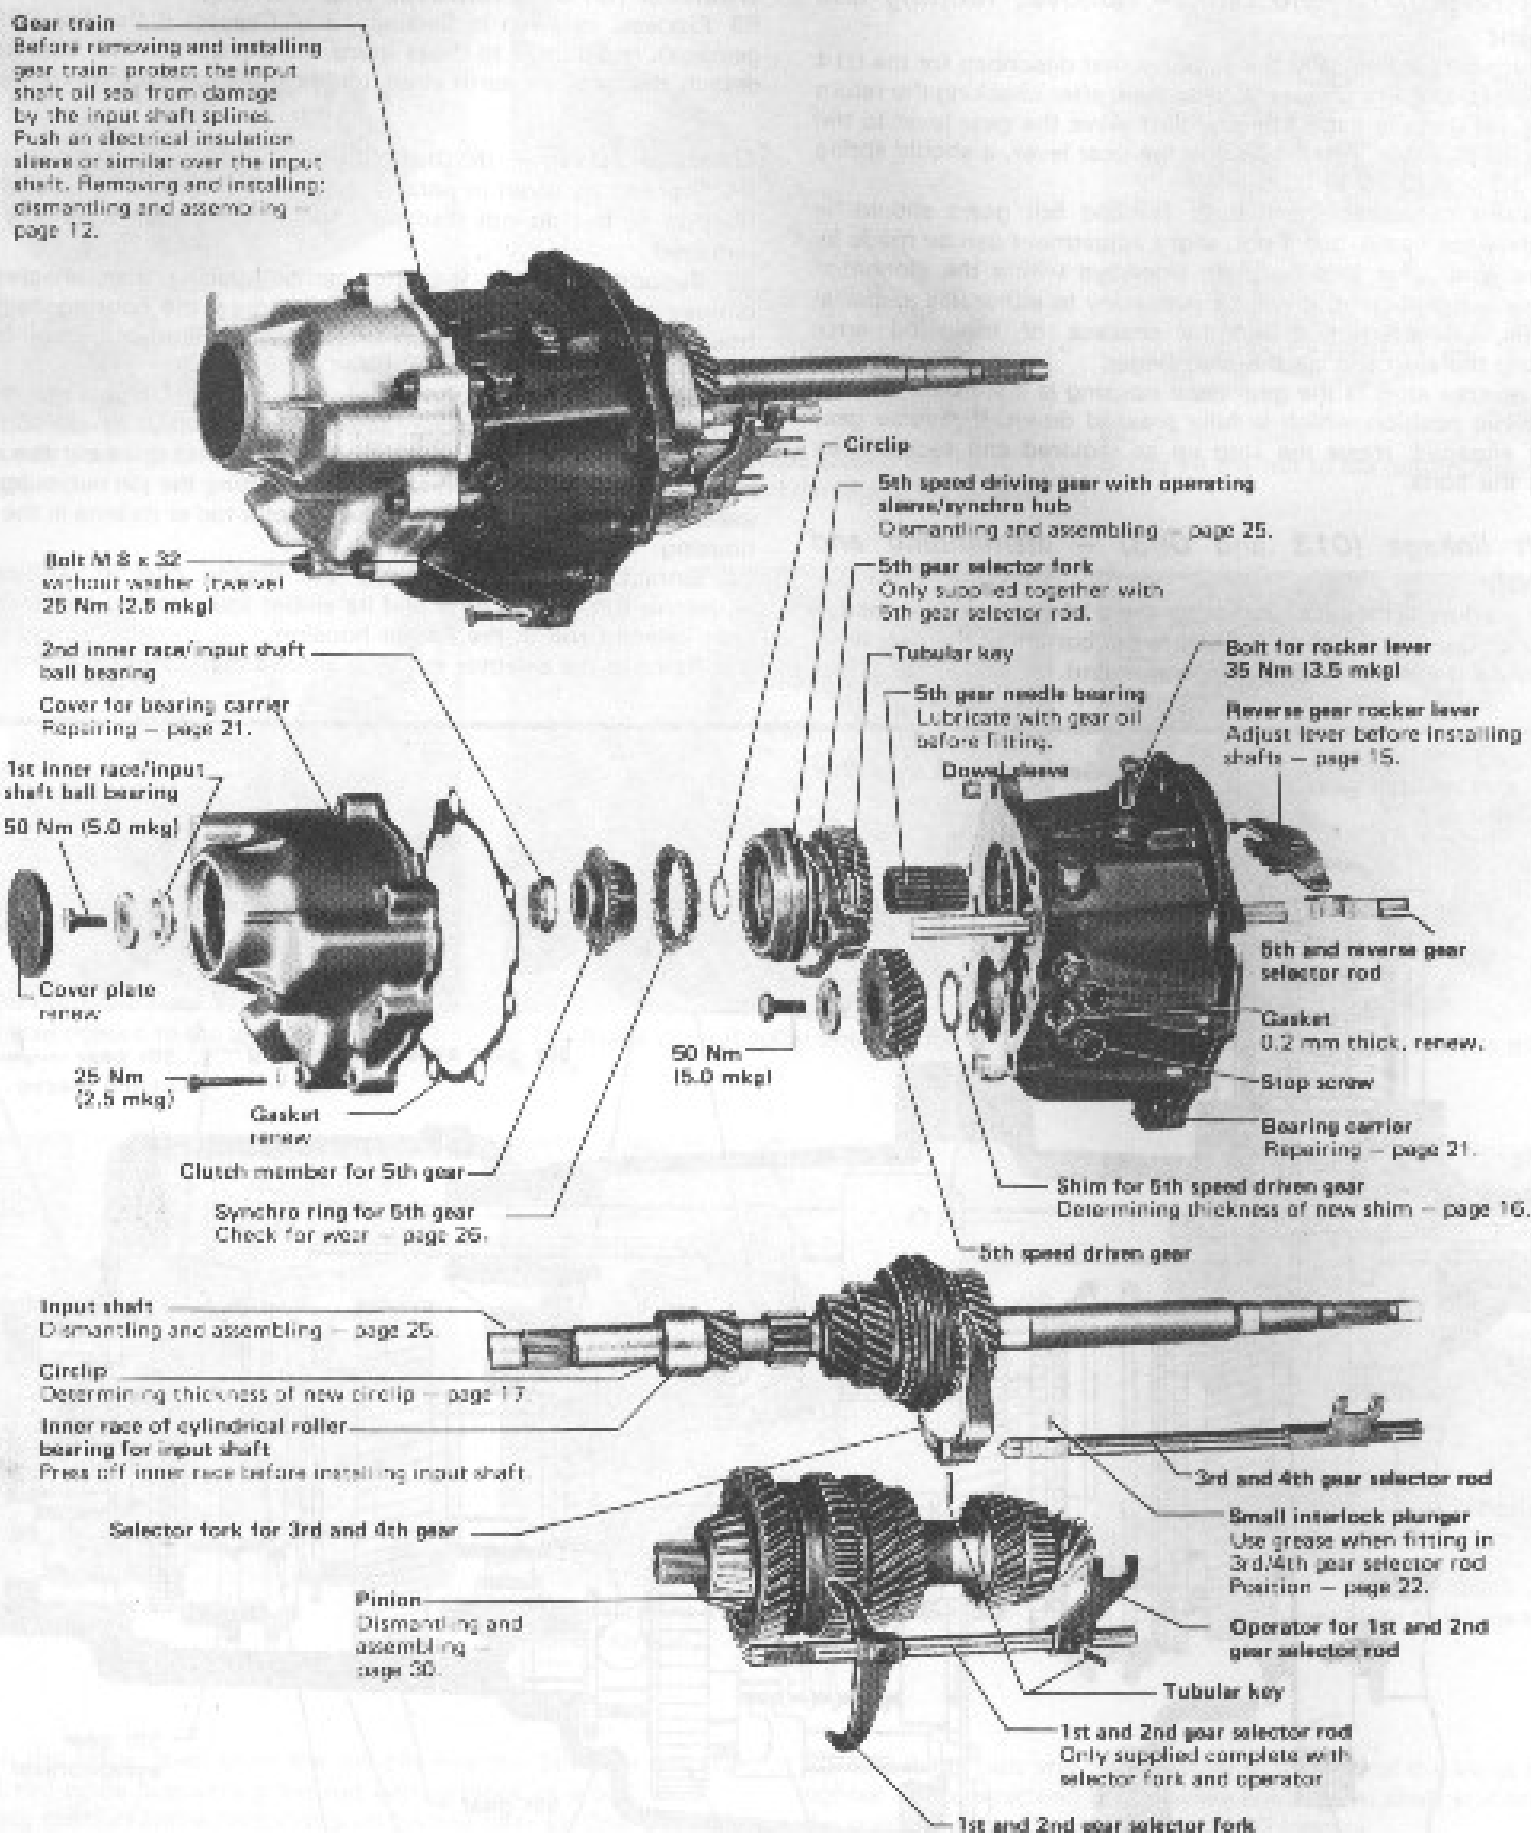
[a] Exploded view of 016 gearbox components (Sec 8)
